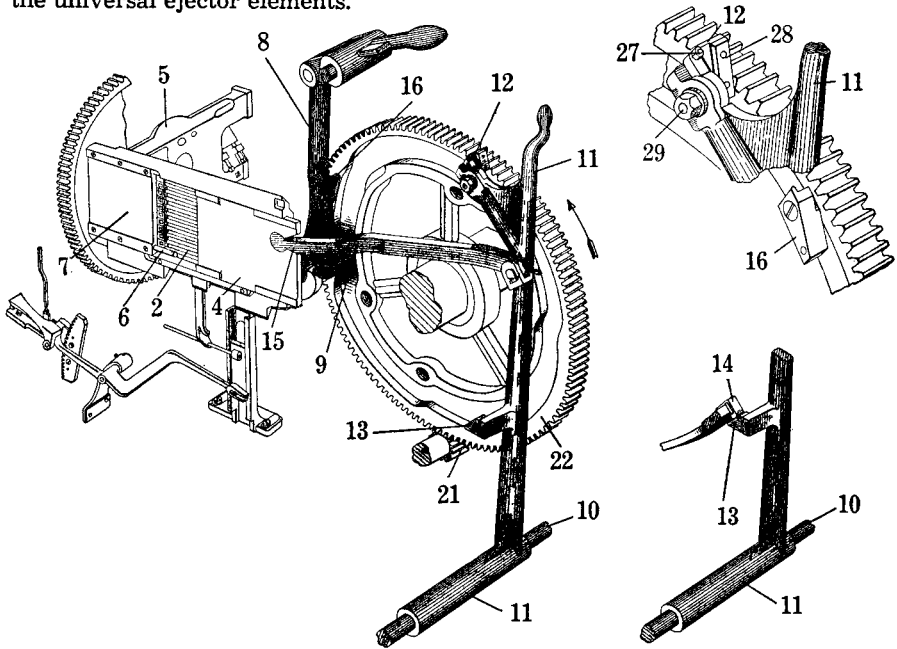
View showing the ejector lever and the cam which operates it, together with the large gear 22 meshing with the pinion 21 on the jack shaft. This gearing causes the rotation of the cam shaft.
